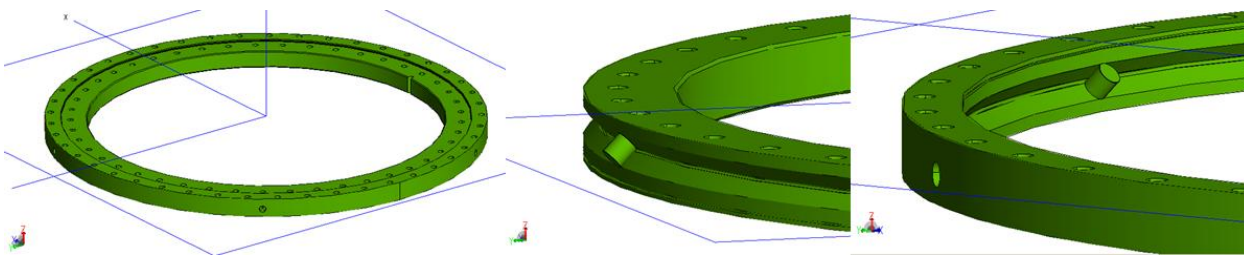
Full scale azimuth bearing design, showing the inner ring of the bearing in the middle picture and the outer ring in the picture on the right. One of the 71 roller elements is shown, designed in such a way to be able to take the weight of the yoke and dish.
